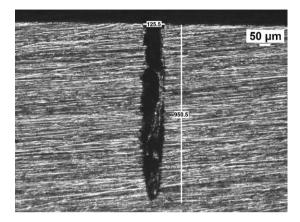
Optical micrograph showing the shape of the drilled hole.
